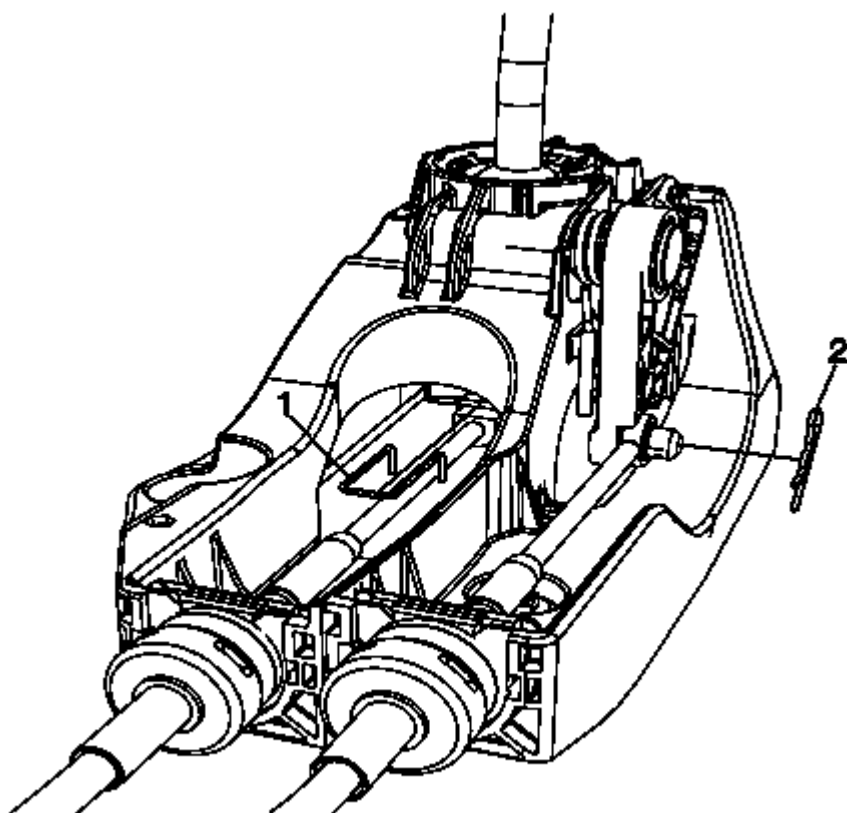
Shift Lever And Selector Lever Cable U-clip
